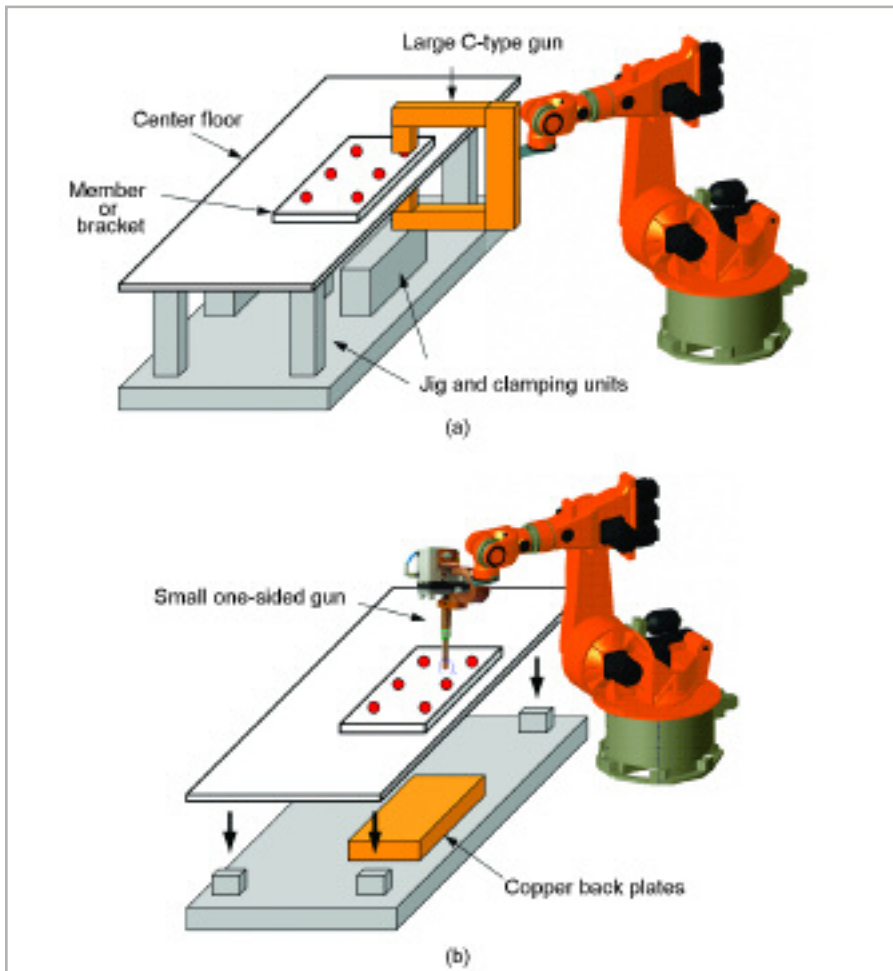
Single-sided RSW of a large panel. A — Large C-type gun with jig and clamping units; and B — single-sided gun with backing plates.
